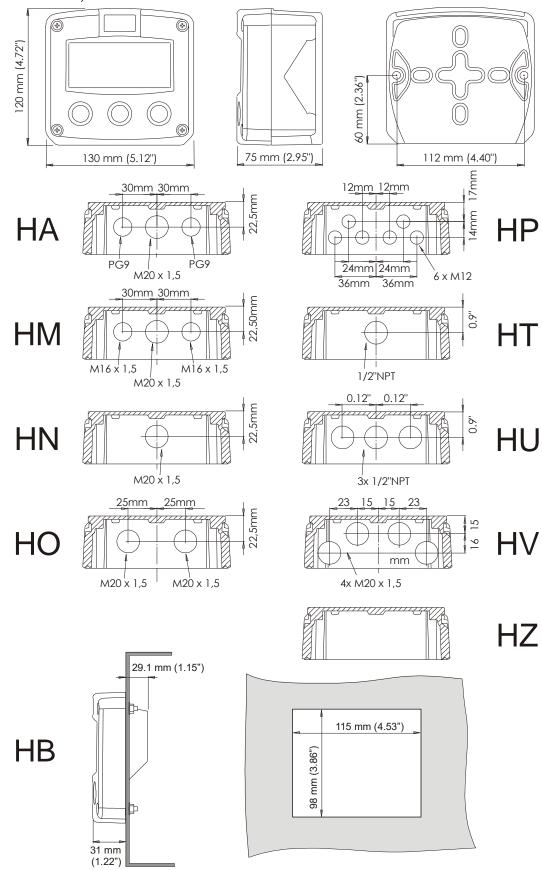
Dimensions - Aluminum and stainless steel enclosures
